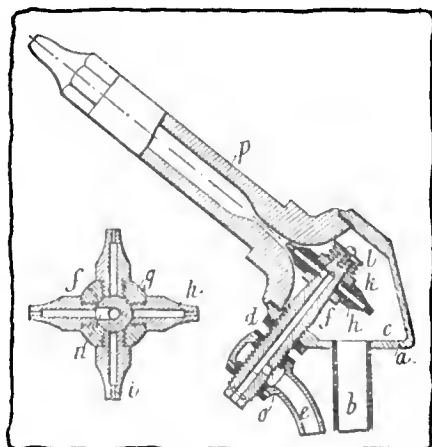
Burner with variable oxygen feed, for autogenous welding
